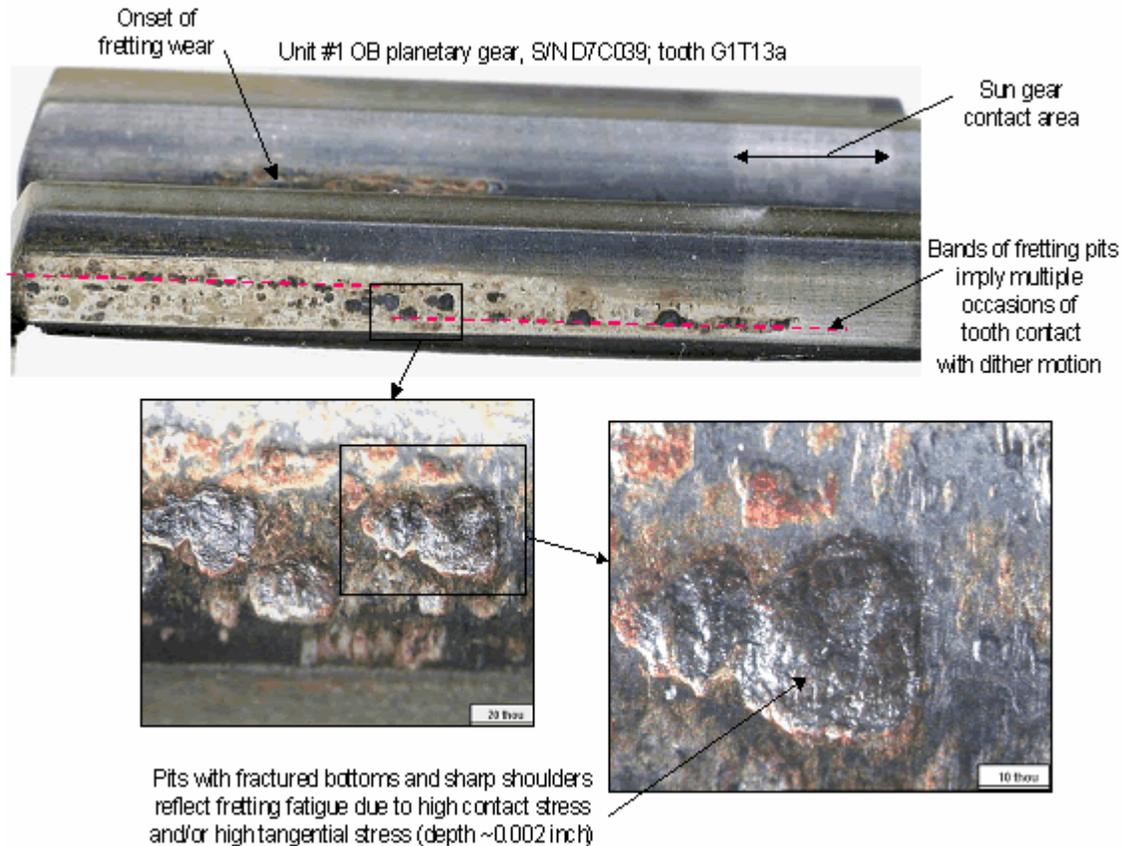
Severe Fretting Wear Damage on R/SB Planetary Gear
